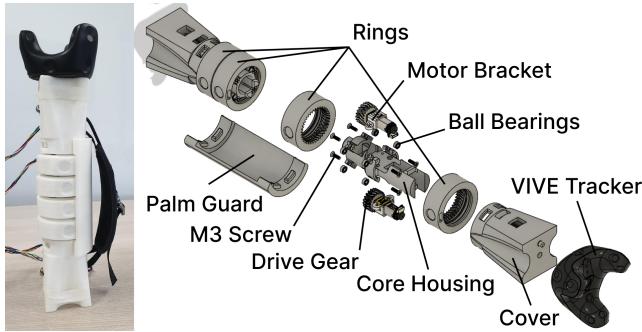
The finger-repositioning device (left). An exploded view of its assembled components (right).
